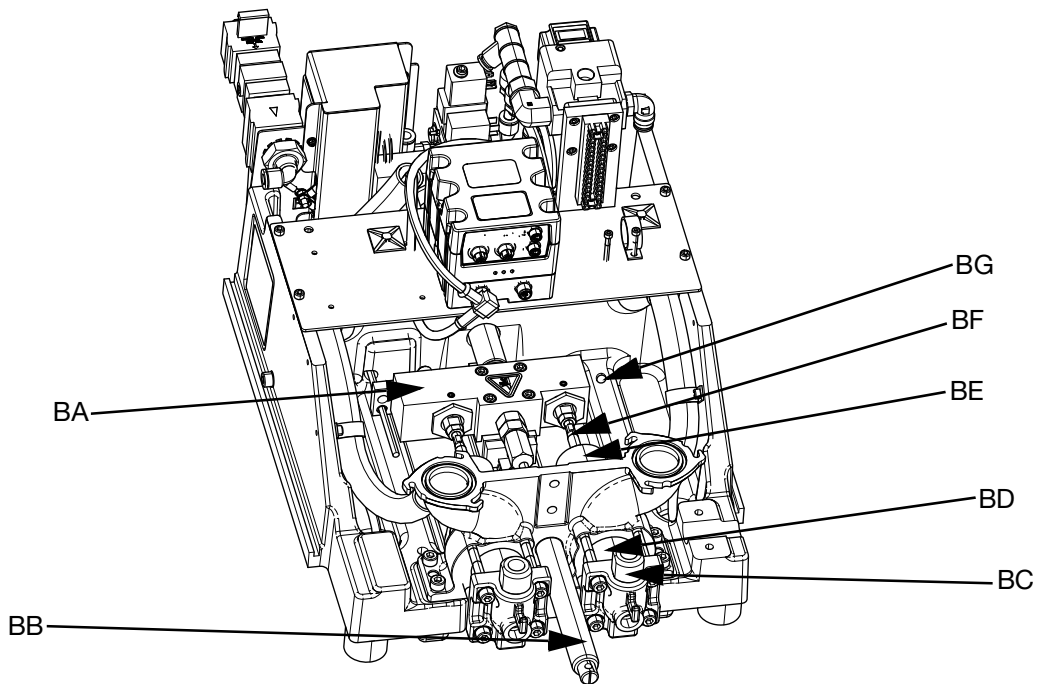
PR70f Front View with Shield, Tanks, Dispense Valve, and ADM Removed
